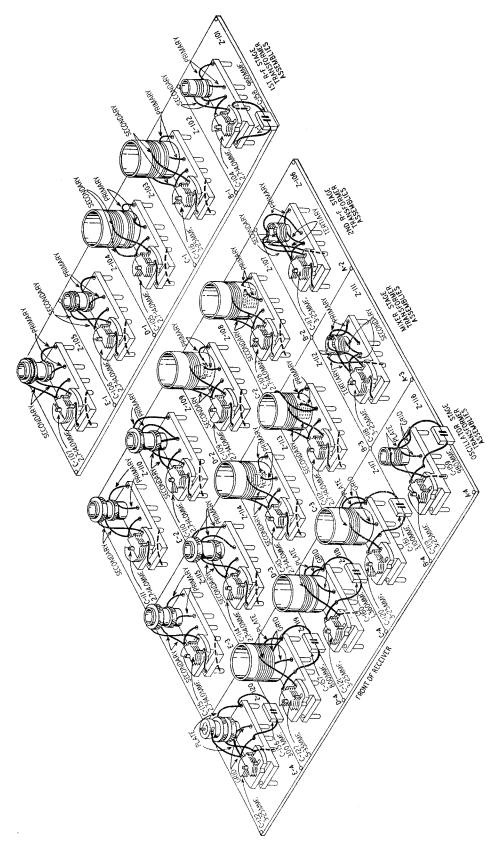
Pictorial Wiring Diagram of Coil Carriage Assembly
